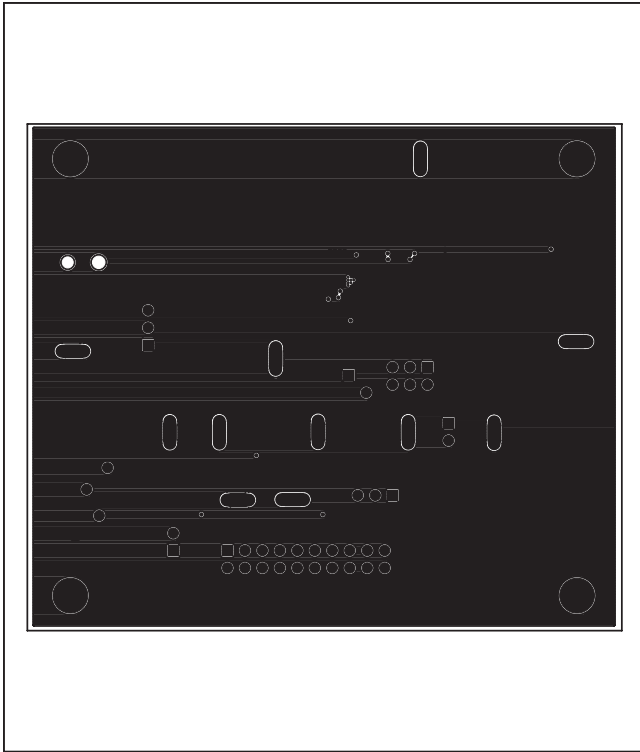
MAX8971 EV Kit PCB Layout—Inner Layer 3
